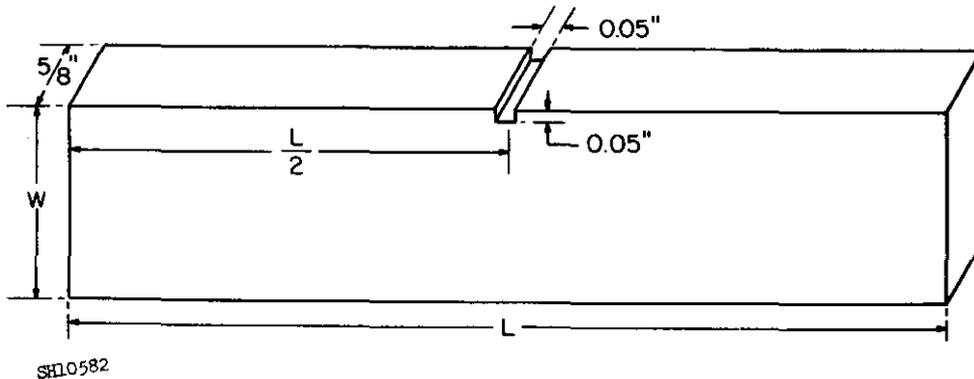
Preparation of 5/8 DT specimen for placing embrittling wire prior to EB welding of crack-starter weld for type C notch.
